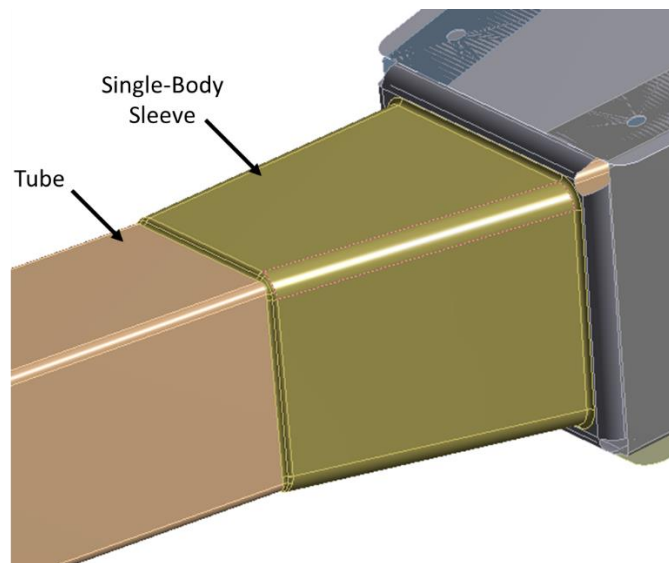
Sleeve component used as an alternative model to the discrete reinforcing plates.
